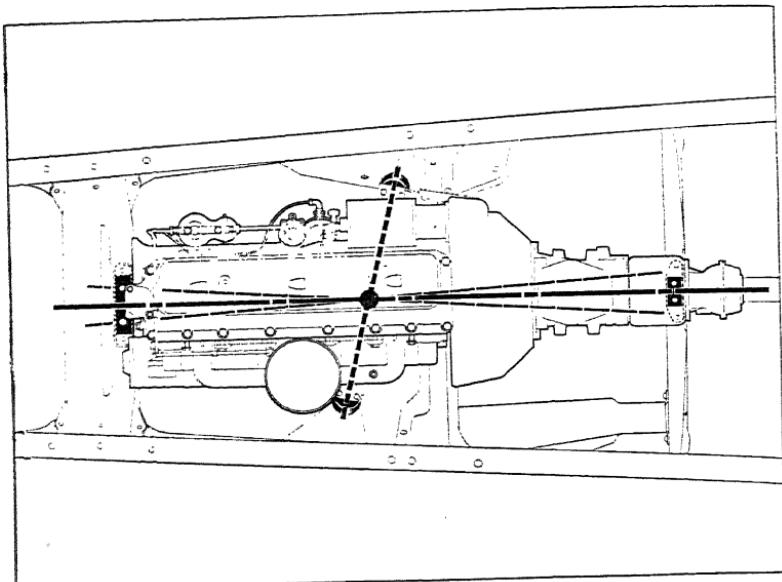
Chevrolet Six Four-Point Engine Mounting
